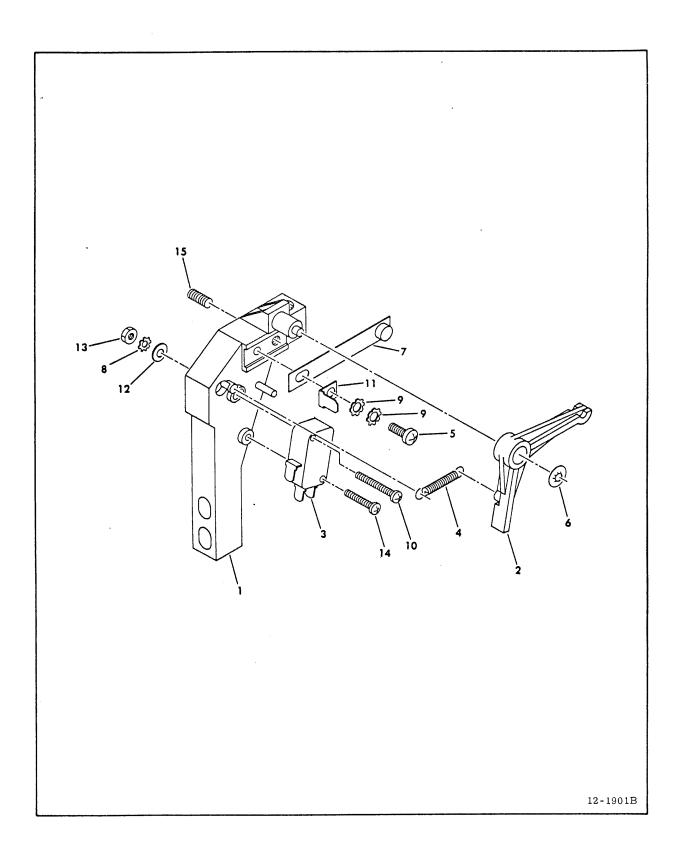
A-22. Pack Sensor Assembly (S/C 09 and Above)
